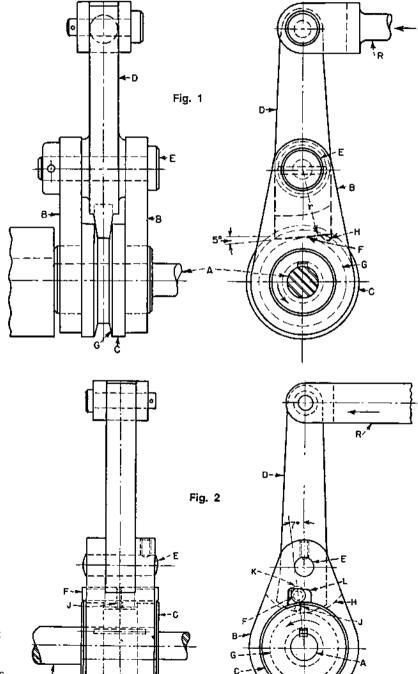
The pin and disk mechanism: Lever D, which pivots around E, contains pin F in an elongated hole K. The hole permits slight vertical movement of the pin, but set screw J prevents horizontal movement. Body B can rotate freely about shaft A. Cut-outs L and H in body B allow clearances for pin F and lever D, respectively. Ring C, which is keyed to shaft A, has an annular groove G to permit clearance for the tip of lever D. Counterclockwise motion of lever D, actuated by the connecting rod, jams a pin between C and the top of cut-out L. This occurs about  $7^{\circ}$  from the vertical axis. A, B, and D are now locked together and rotate about A. The return stroke of R pivots D clockwise around E and unwedges the pin until it strikes the side of L. Continued motion of R to the right rotates B and D clockwise around A, while the uncoupled shaft remains stationary because of its load.
